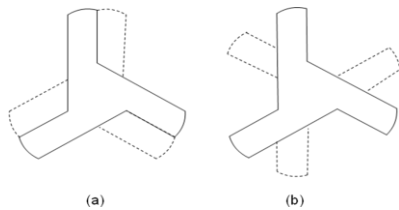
Bottom view of a 3-wing double rotor with. The solid line shows the lower rotor and the dotted line shows the upper rotor with wing angle of (a) 0° and (b) 60° .
